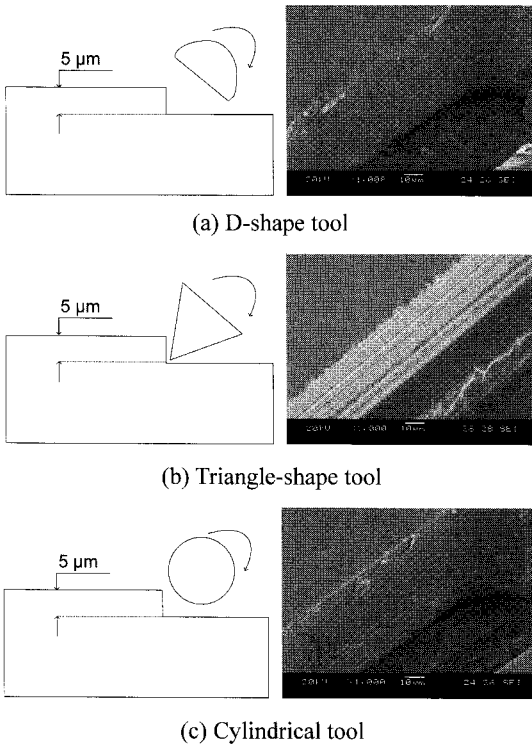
Micro grooves machined by micro PCD tools of various shapes
